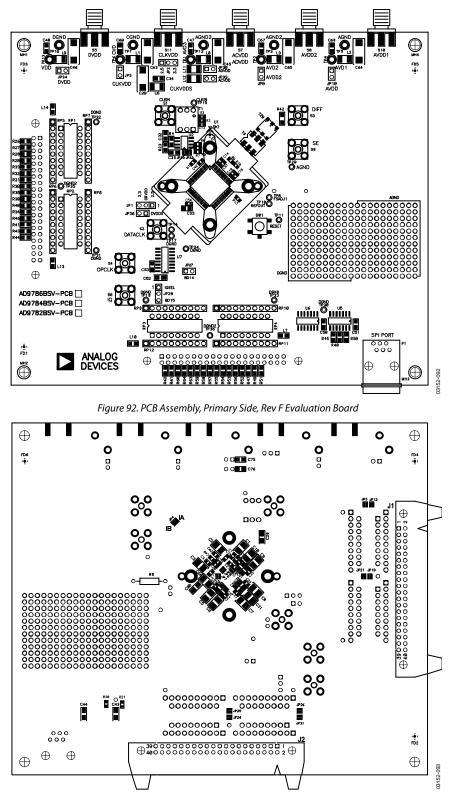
PCB Assembly, Secondary Side, Rev F Evaluation Board
